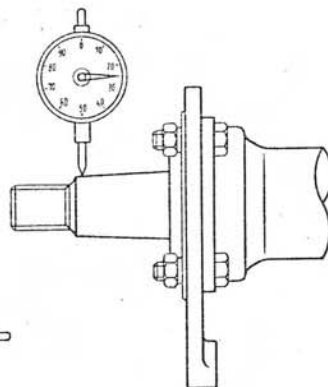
Diagram for checking and assembling front and rear brake disc and caliper.
